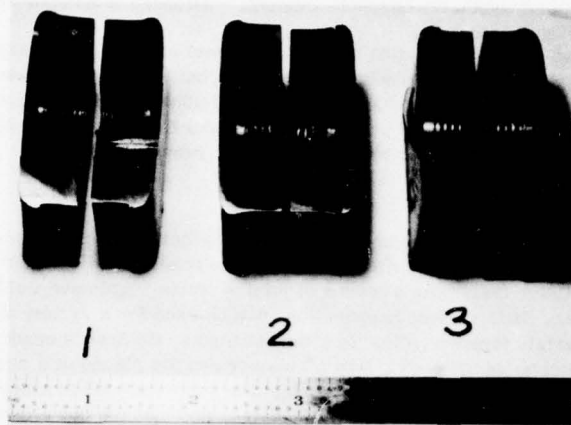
Blister Test Specimens for Explosive Weld Evaluation
